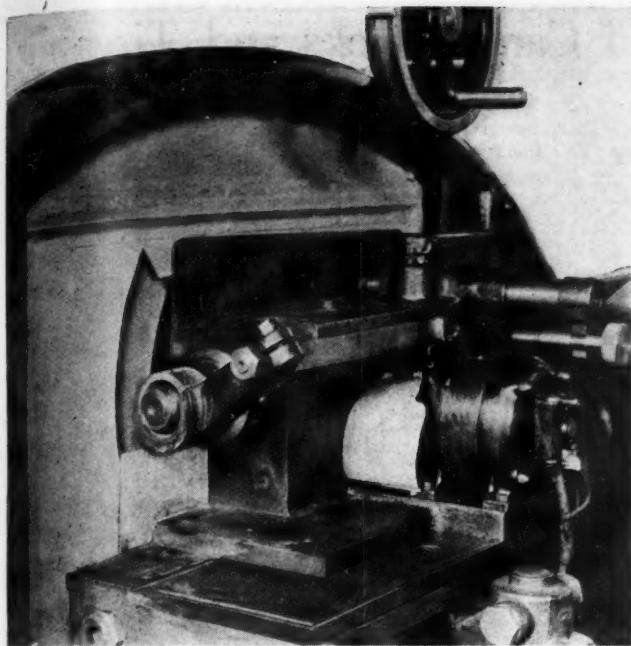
Osterholm automatic surface grinder adapted for cylindrical grinding
